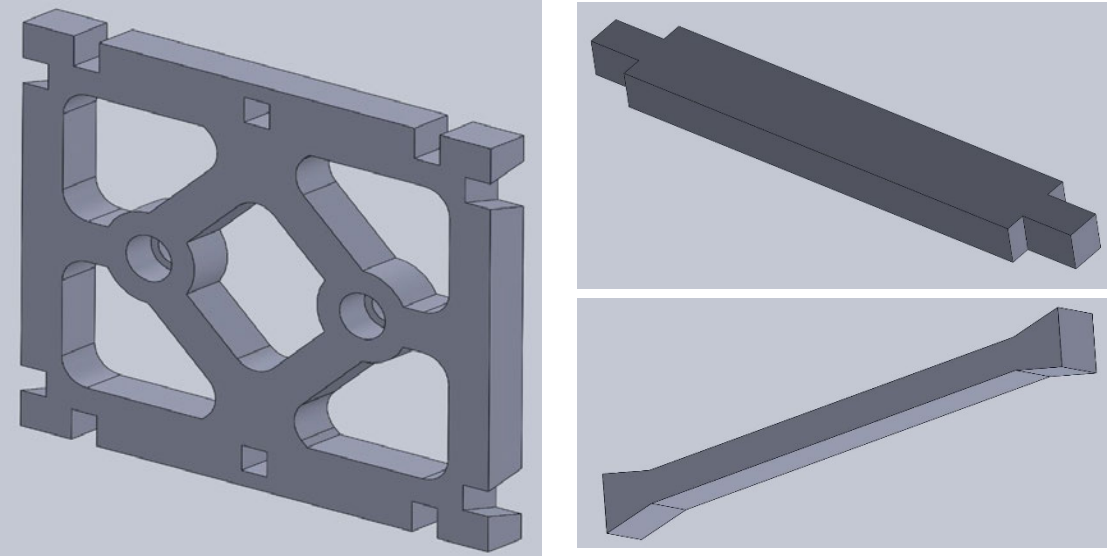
CAD renders of the gearbox design housing. The sides (left) have holes for the input and output shafts as well as notches for the connecting beams (right).
